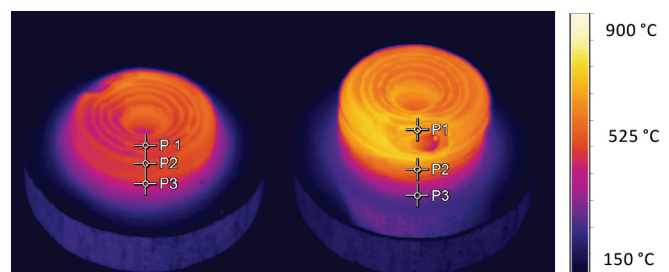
Arrangement of the three measurement points after a) the fourth layer b) the eighth layer
